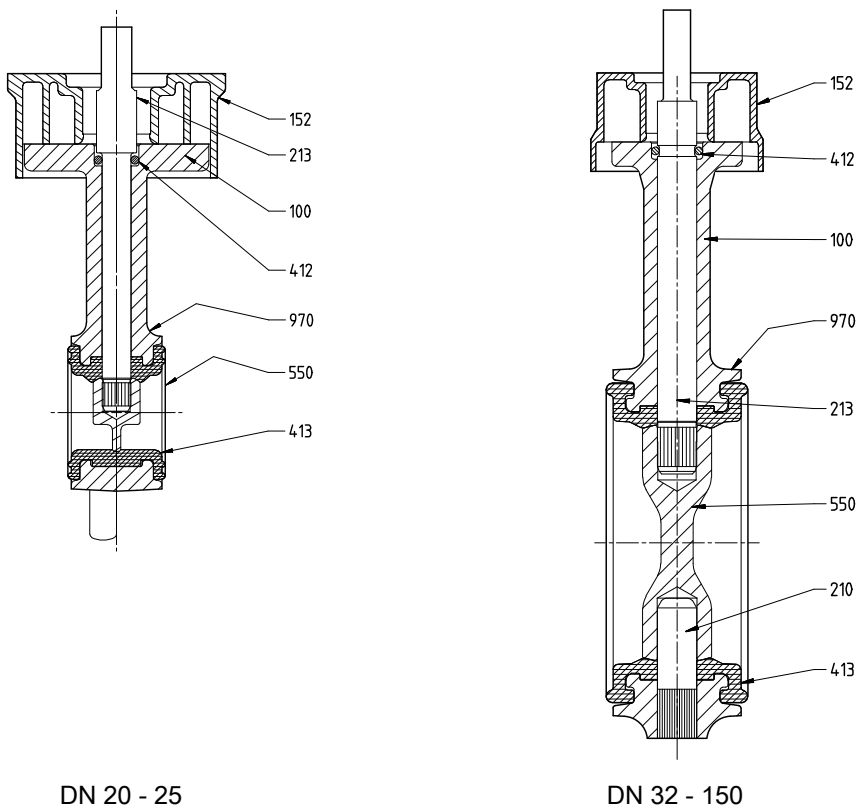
Sectional drawings of BOAX-S/SF DN 20 to DN 150
